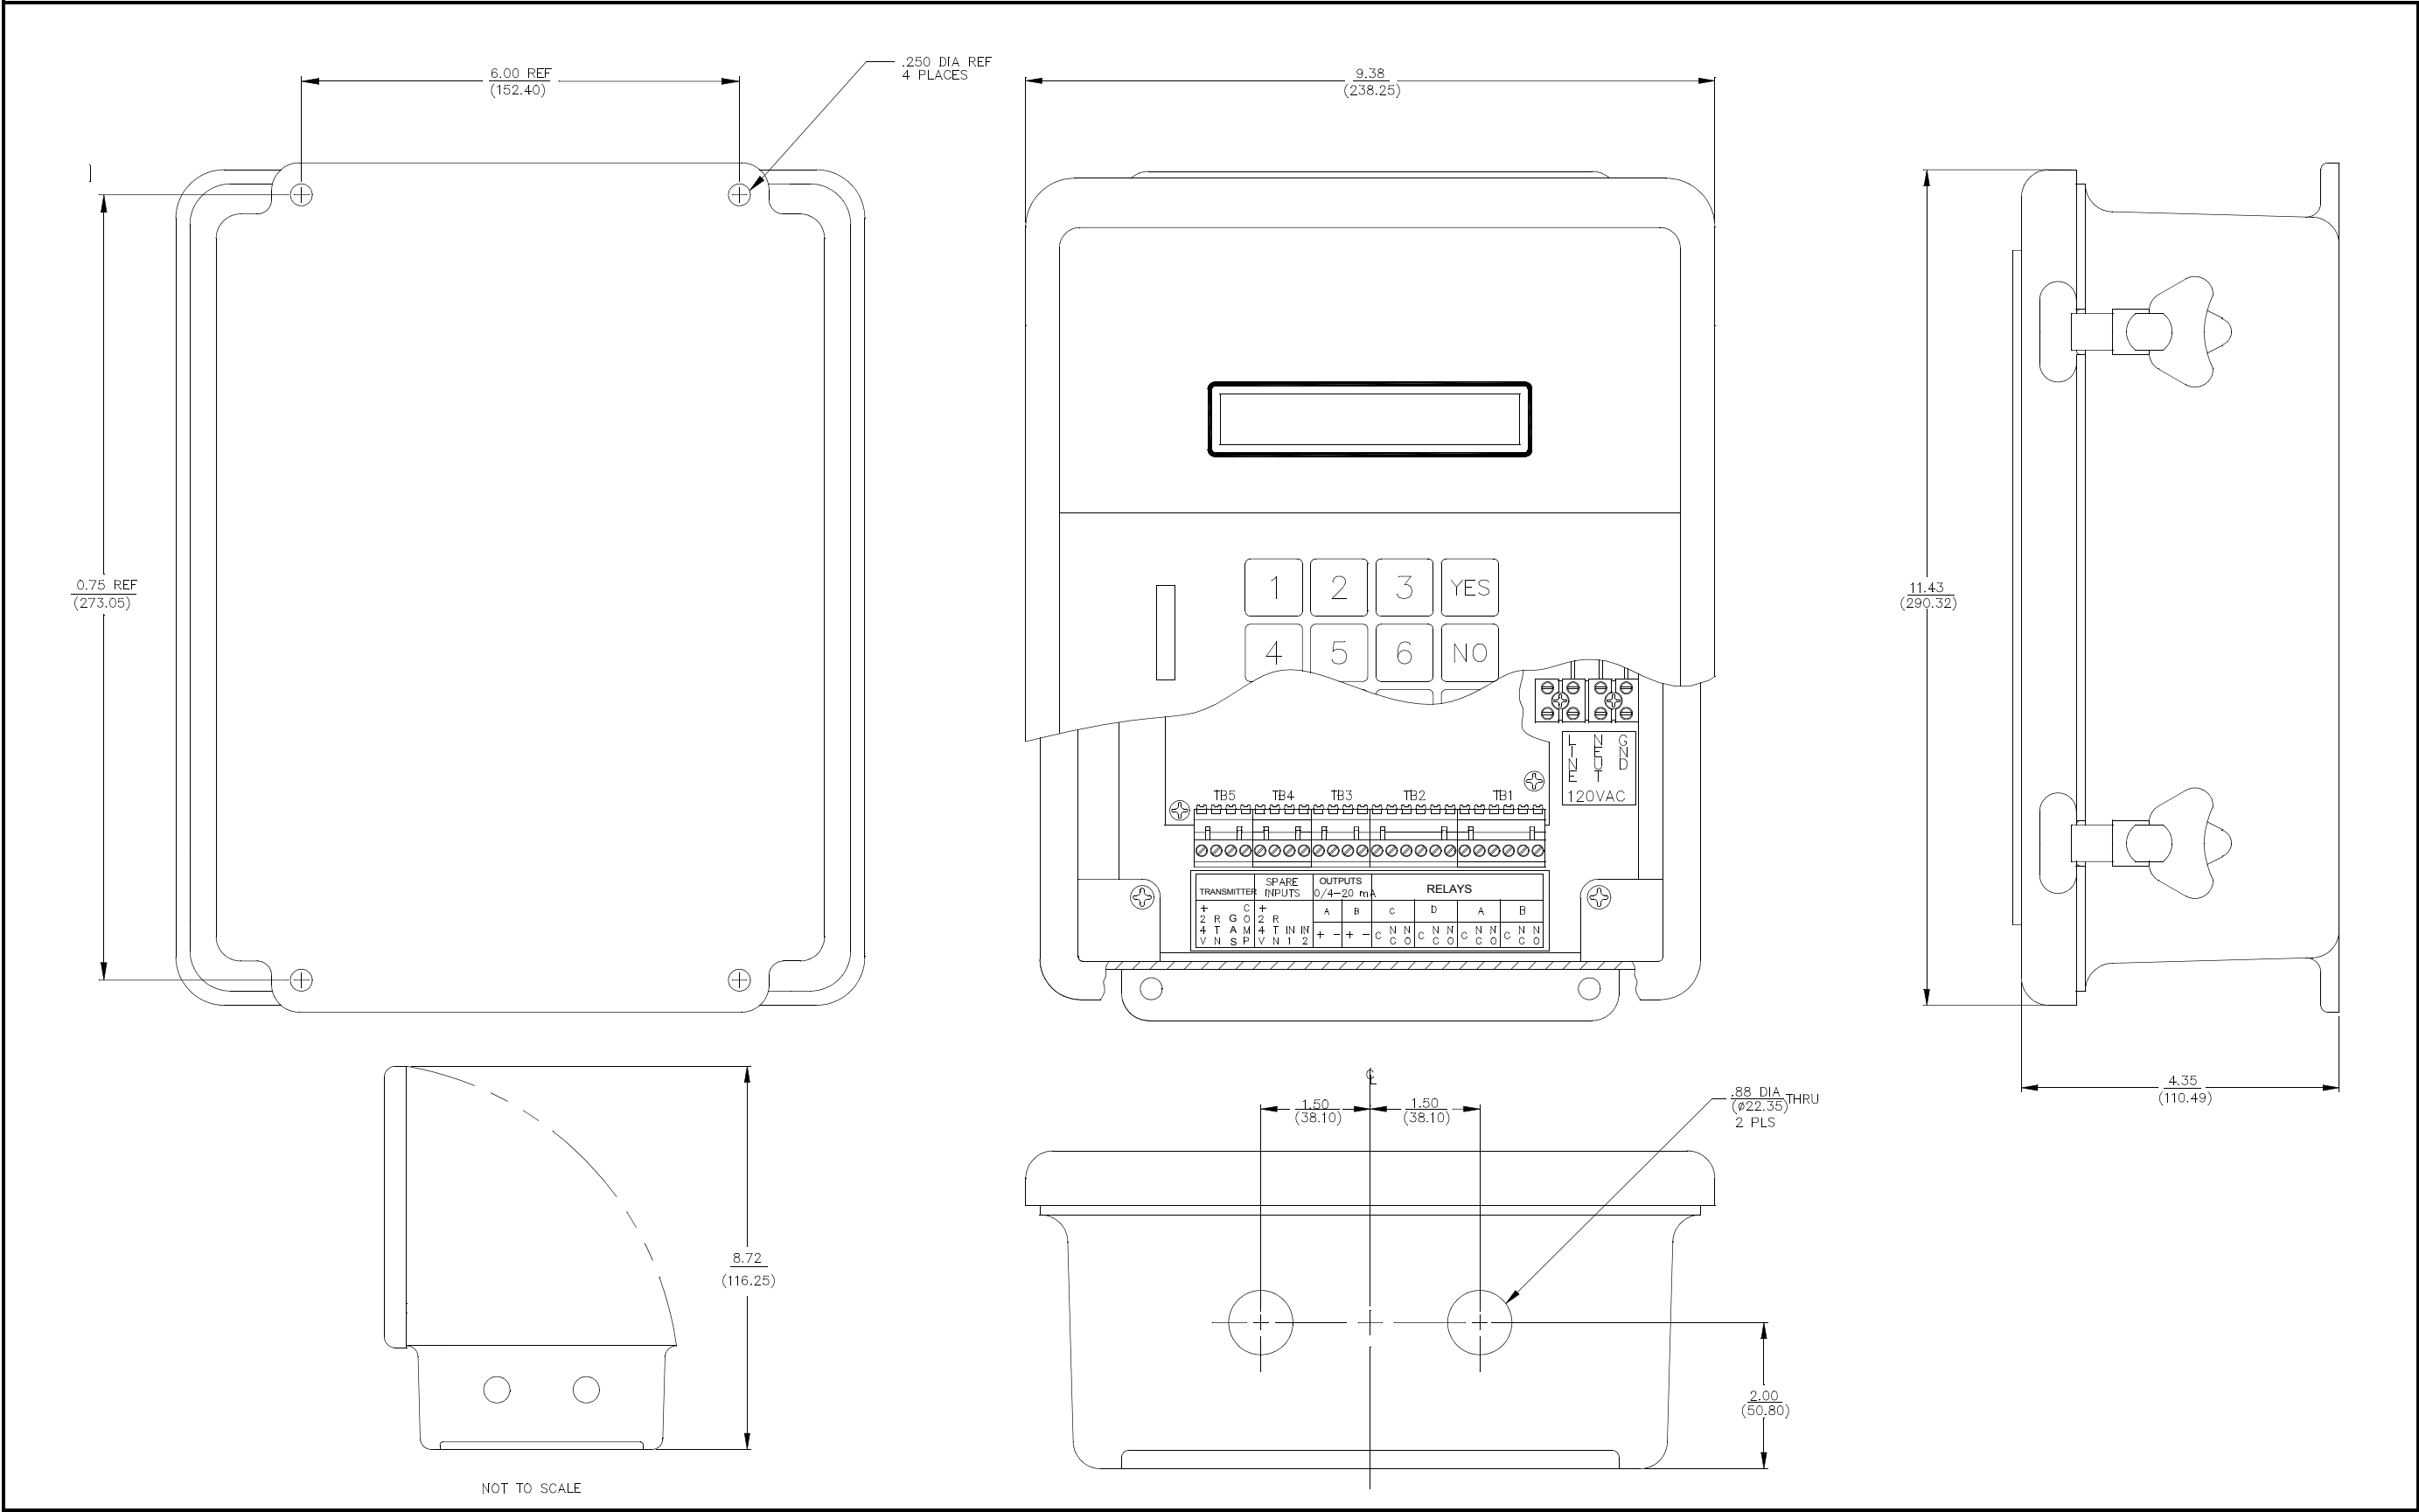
Fiberglass Weatherproof Outline and Dimensions (Dwg. #701-030)
